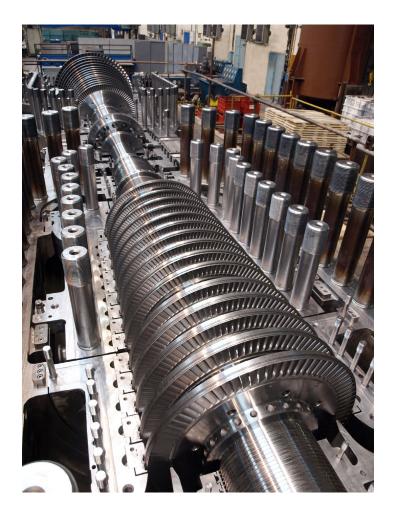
HP and IP Sections of a Steam Turbine (www.skoda.cz)
